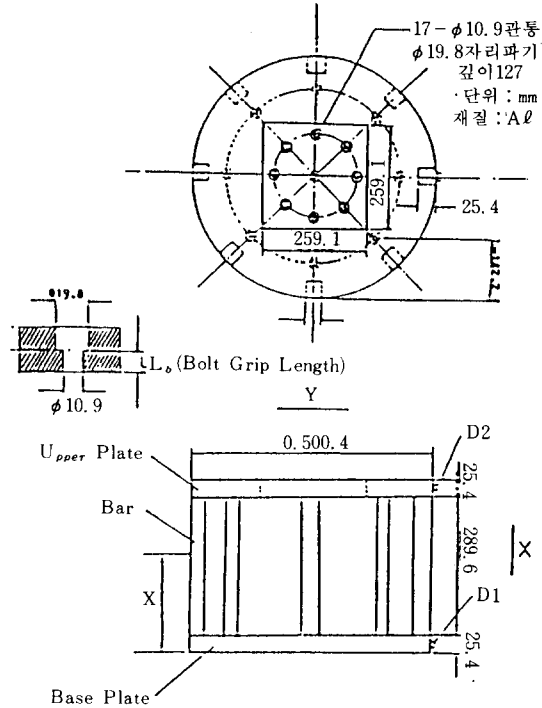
Dimension and Shape of Complex Shaped Fixture I
